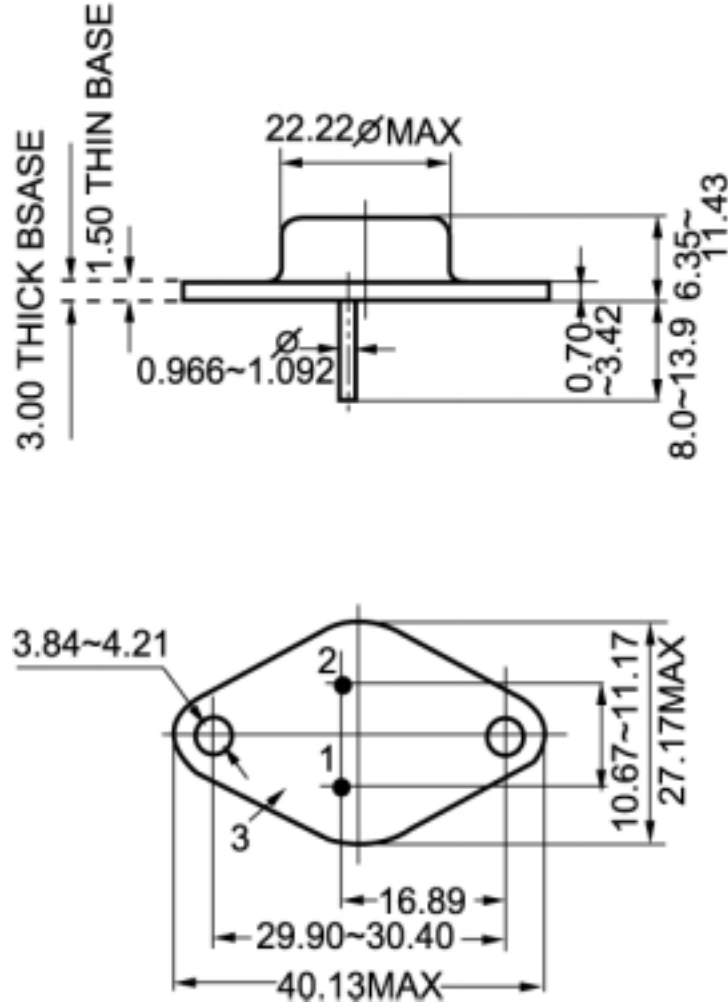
outline dimensions (unindicated tolerance:  $\pm 0.10$ mm)
